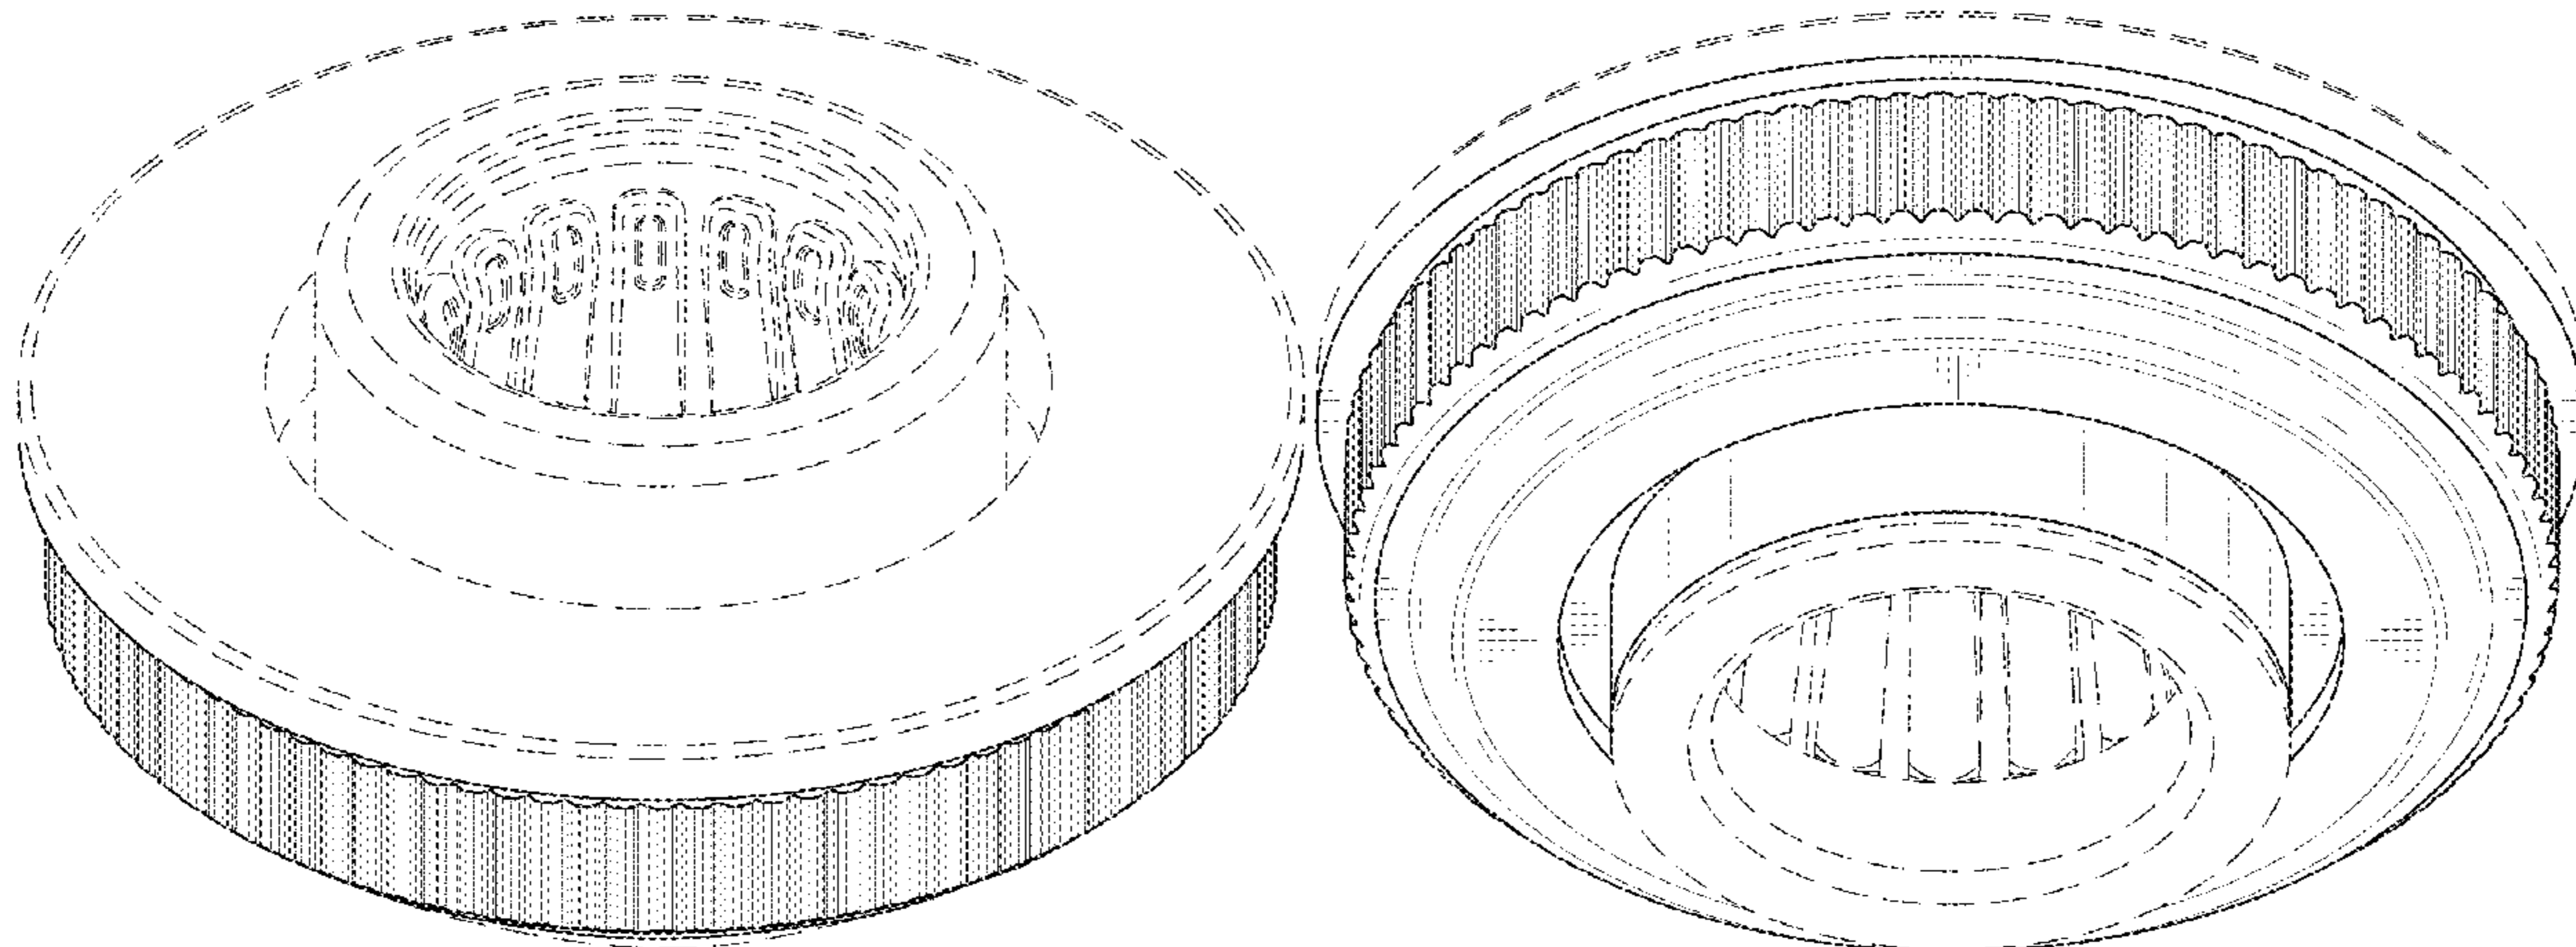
is a top perspective view of a floating socket connector showing our new design;
